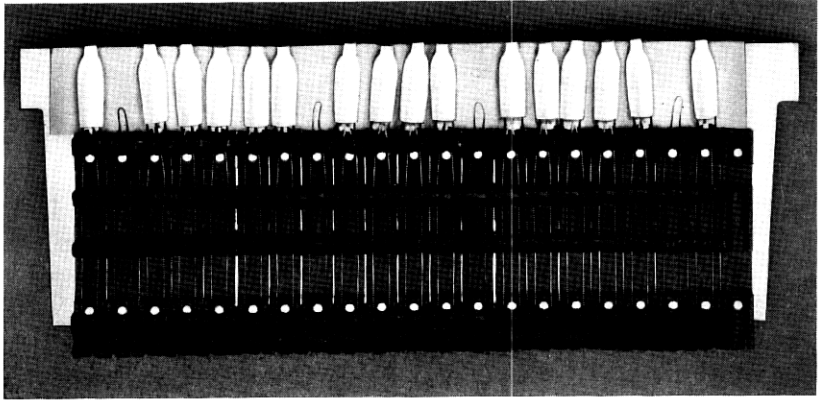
B Wire Connectors on mounting board used in automated bridge.
